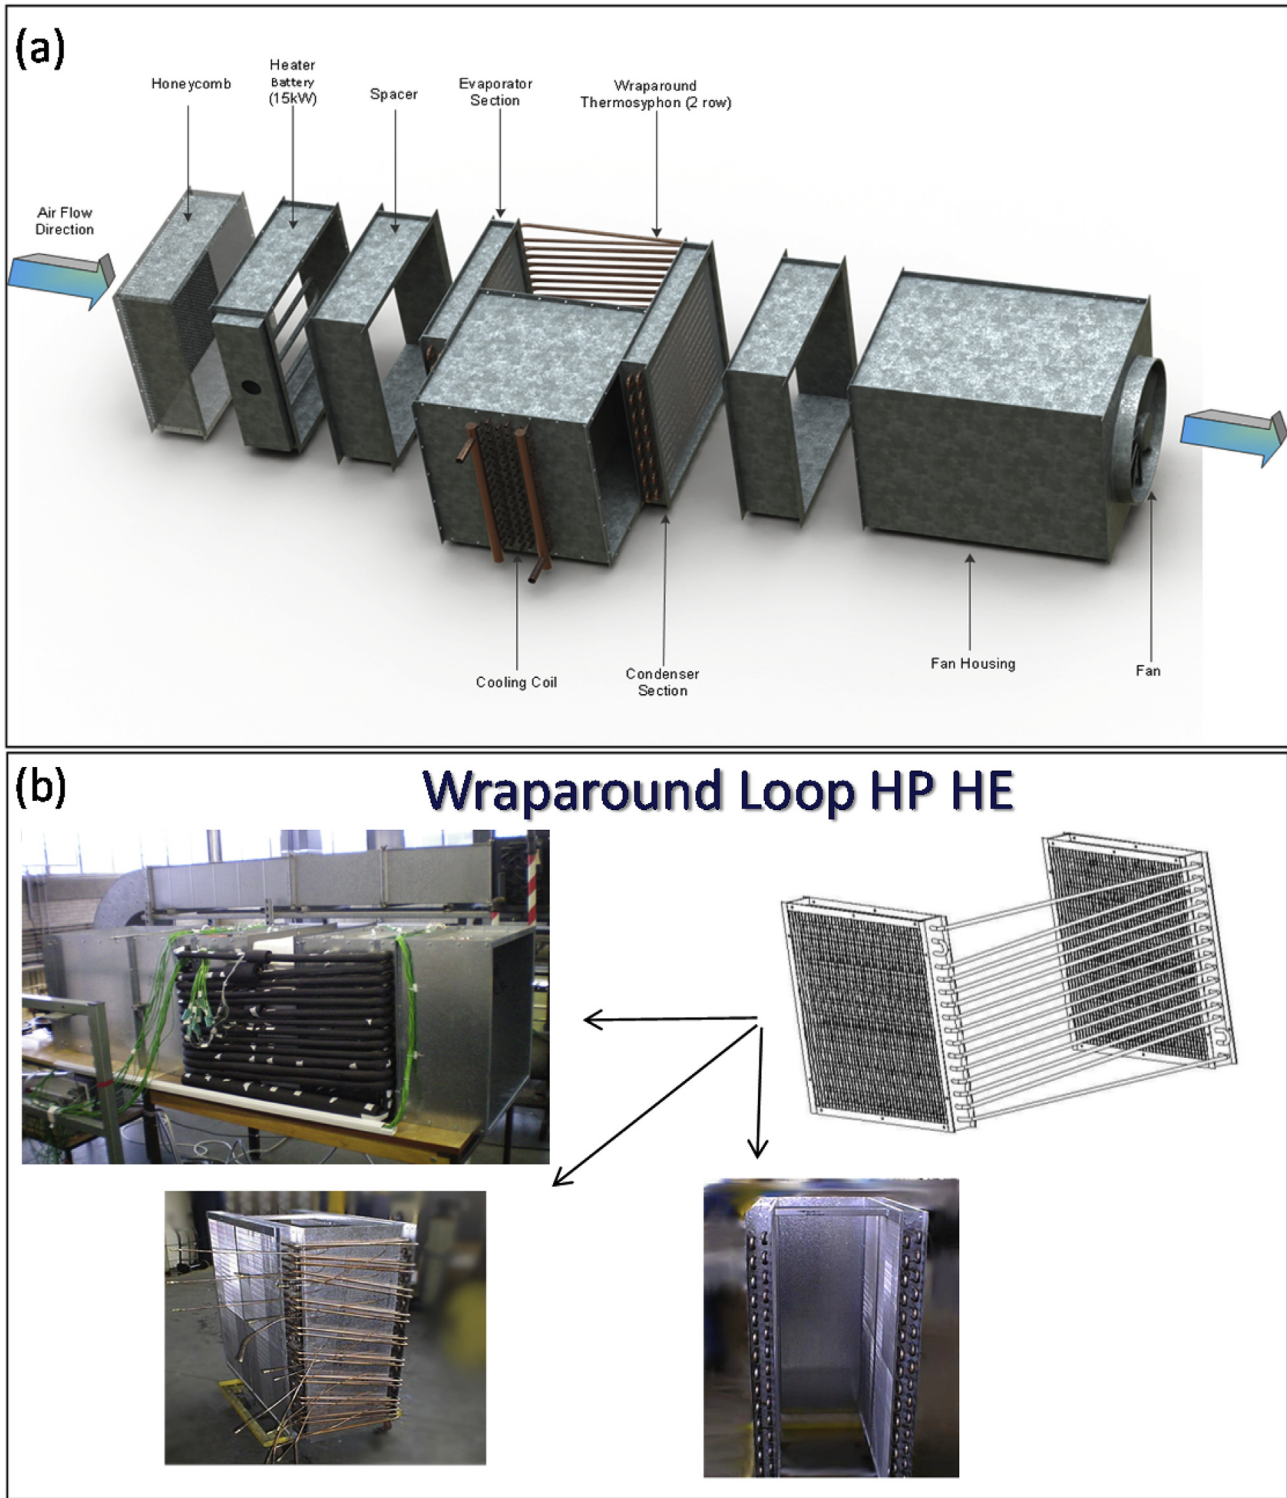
(a) Exploded assembly details, (b) Actual mechanical design of the wraparound heat pipe.
